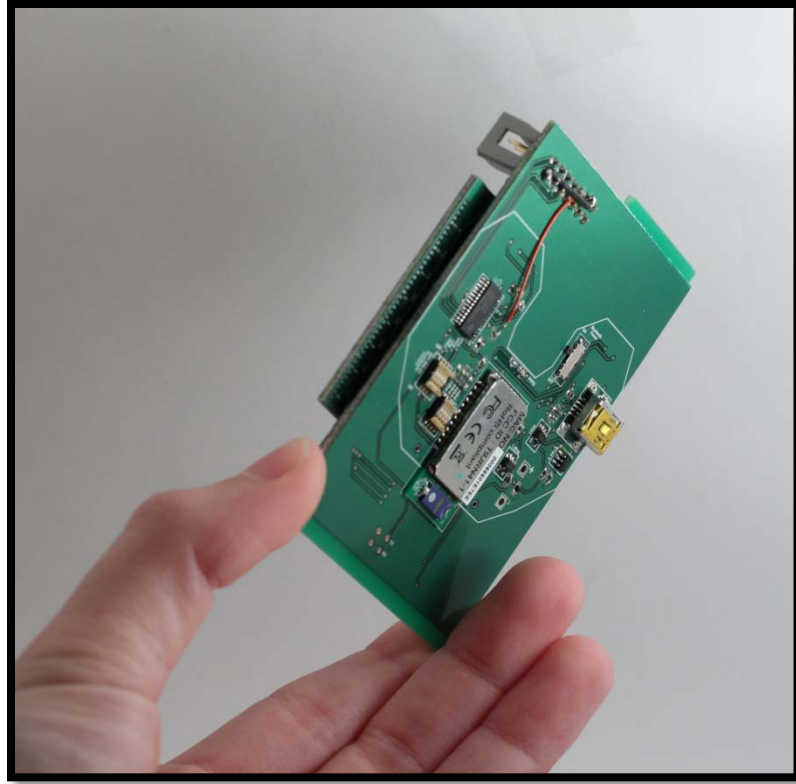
Final CDC readout boards, showing stacked configuration. View is from the bottom. Configuration ports for both μC remain intact, but are removable, further reducing the size of the device.
